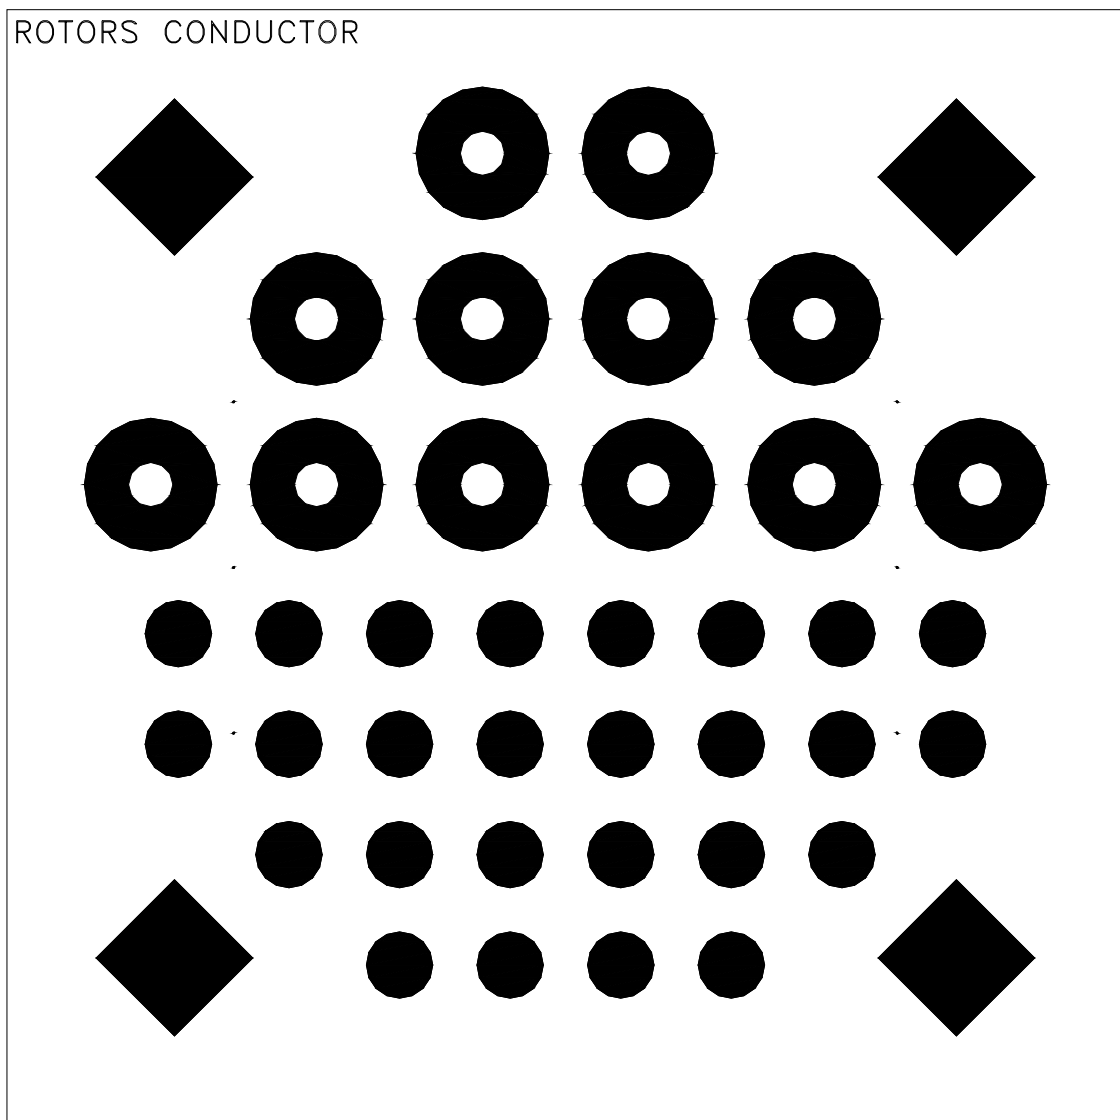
Induction machine rotor conductor plating mask (clearfield).
